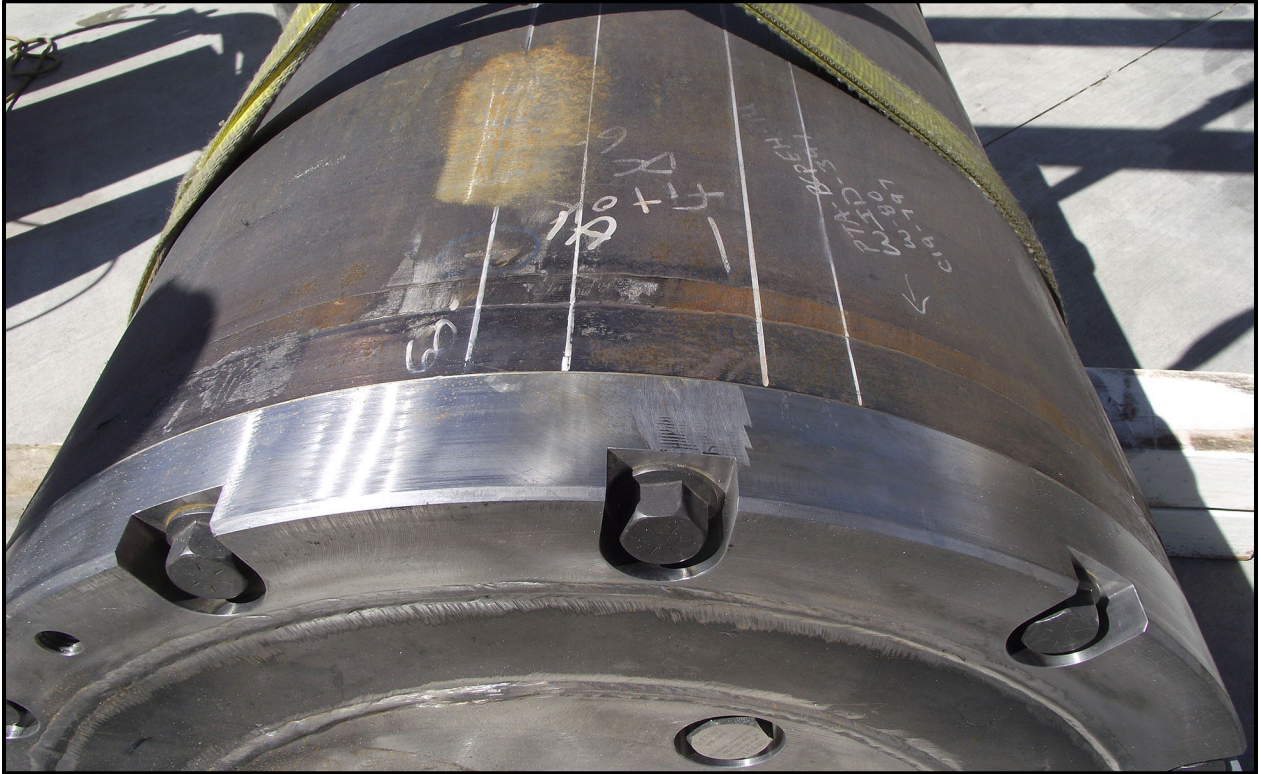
SC-30G3 18TU-04 Superficial Sidewall Damage
